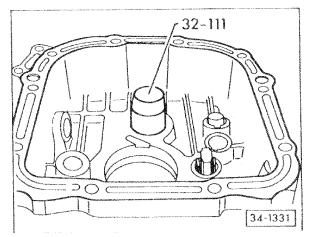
Pinion needle bearing in gear carrier housing, removing
